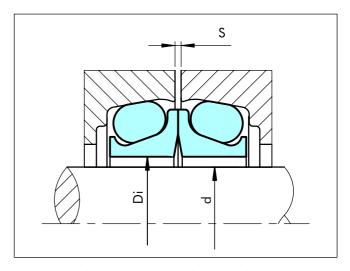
Roller Bearing Steel design with smooth and cylindrical treatment at the inside diameter
